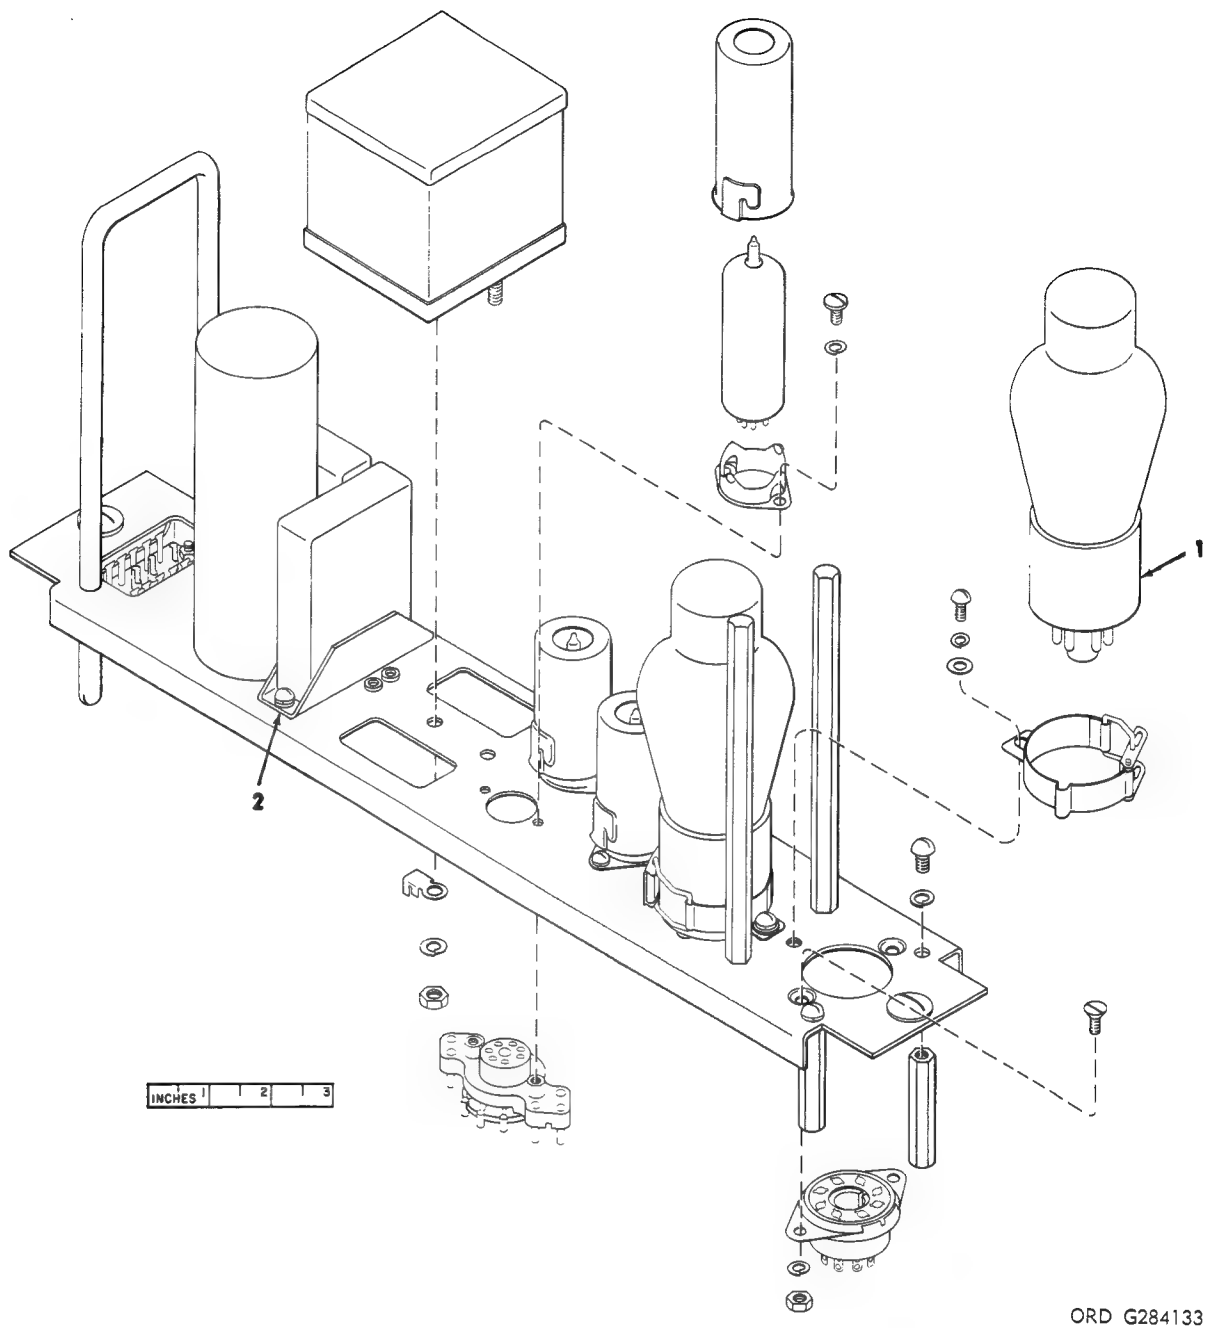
Regulator, voltage CN-280/M (9137641)—partial exploded view
